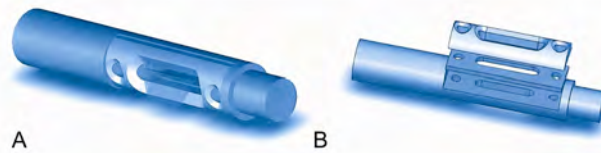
A: Assembled paste-sample holder. B: Exploded view drawing of the sample holder. From bottom to top the sample holder body, sample holder plate and the cover piece for closing are shown.
